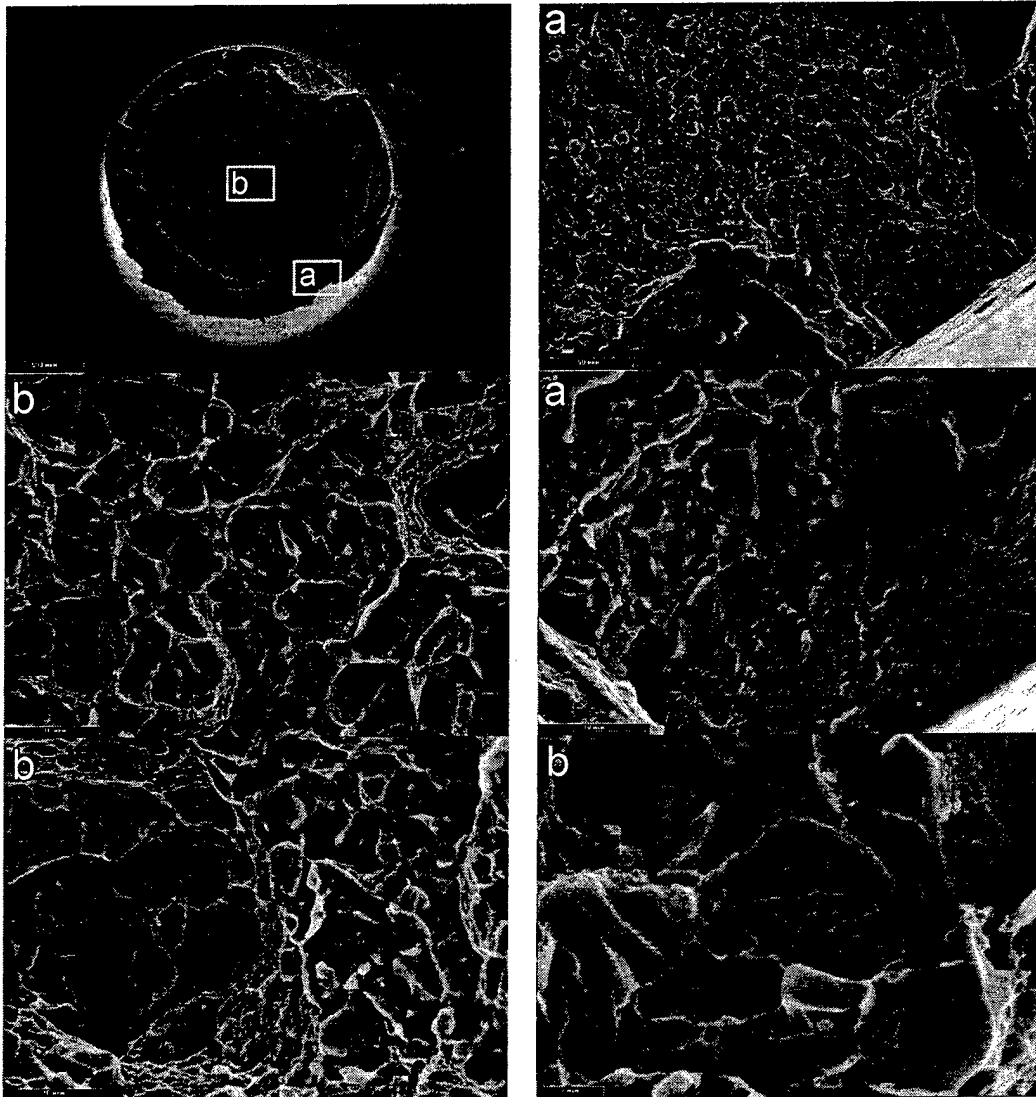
Fracture surface of TIMETAL-LCB in RR condition (aging at 538°C, 15min).
